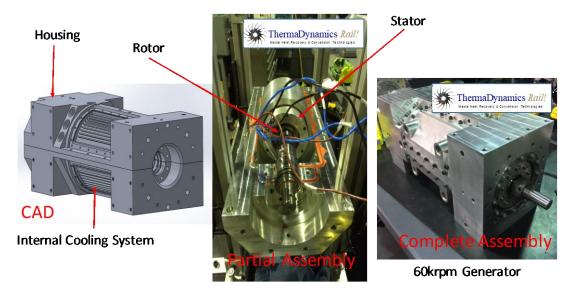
Direct-drive high-speed generator-motor, from CAD to final assembly
